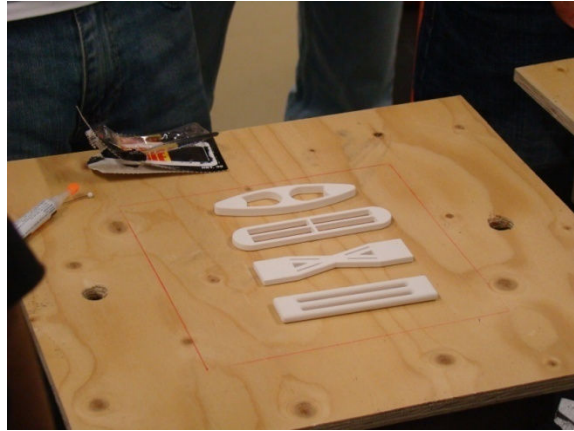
Rapid prototype patterns. This process uses a polymer for the part. After making the part, the students coat it with super glue to make the part tougher.
